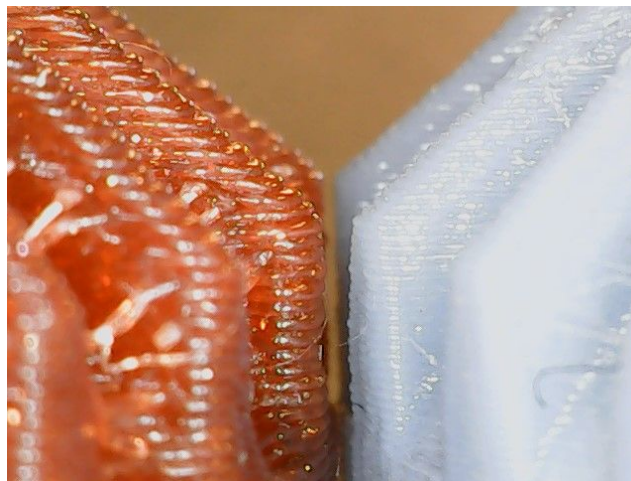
Gears printed with 0.4 mm (left) vs 0.25 mm (right) nozzle
